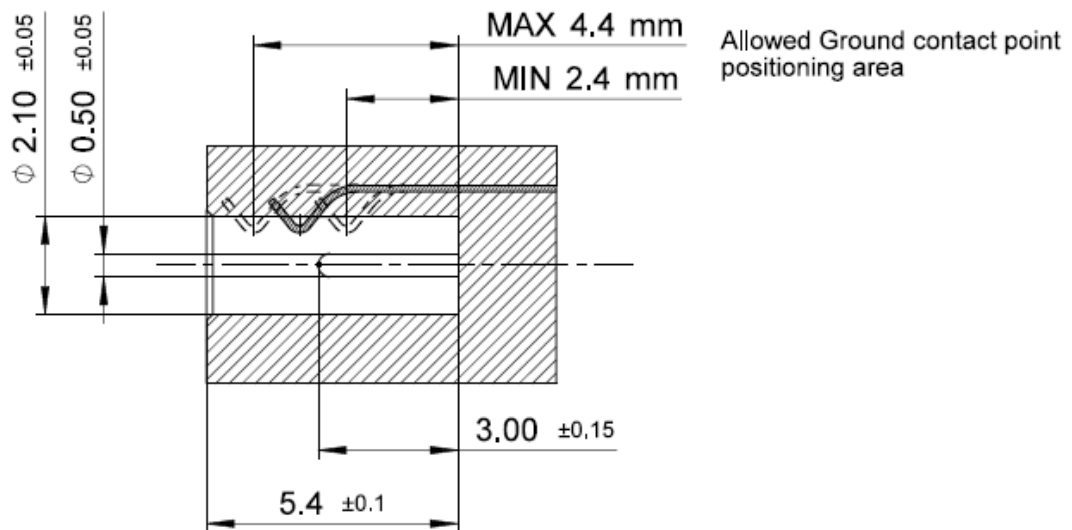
Outer molding dimensions for 2 mm barrel charging plug
